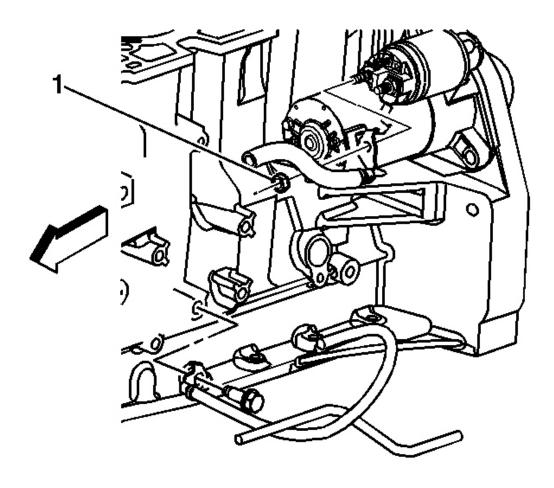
View Of Starter & Related Components Courtesy of GENERAL MOTORS CORP.
